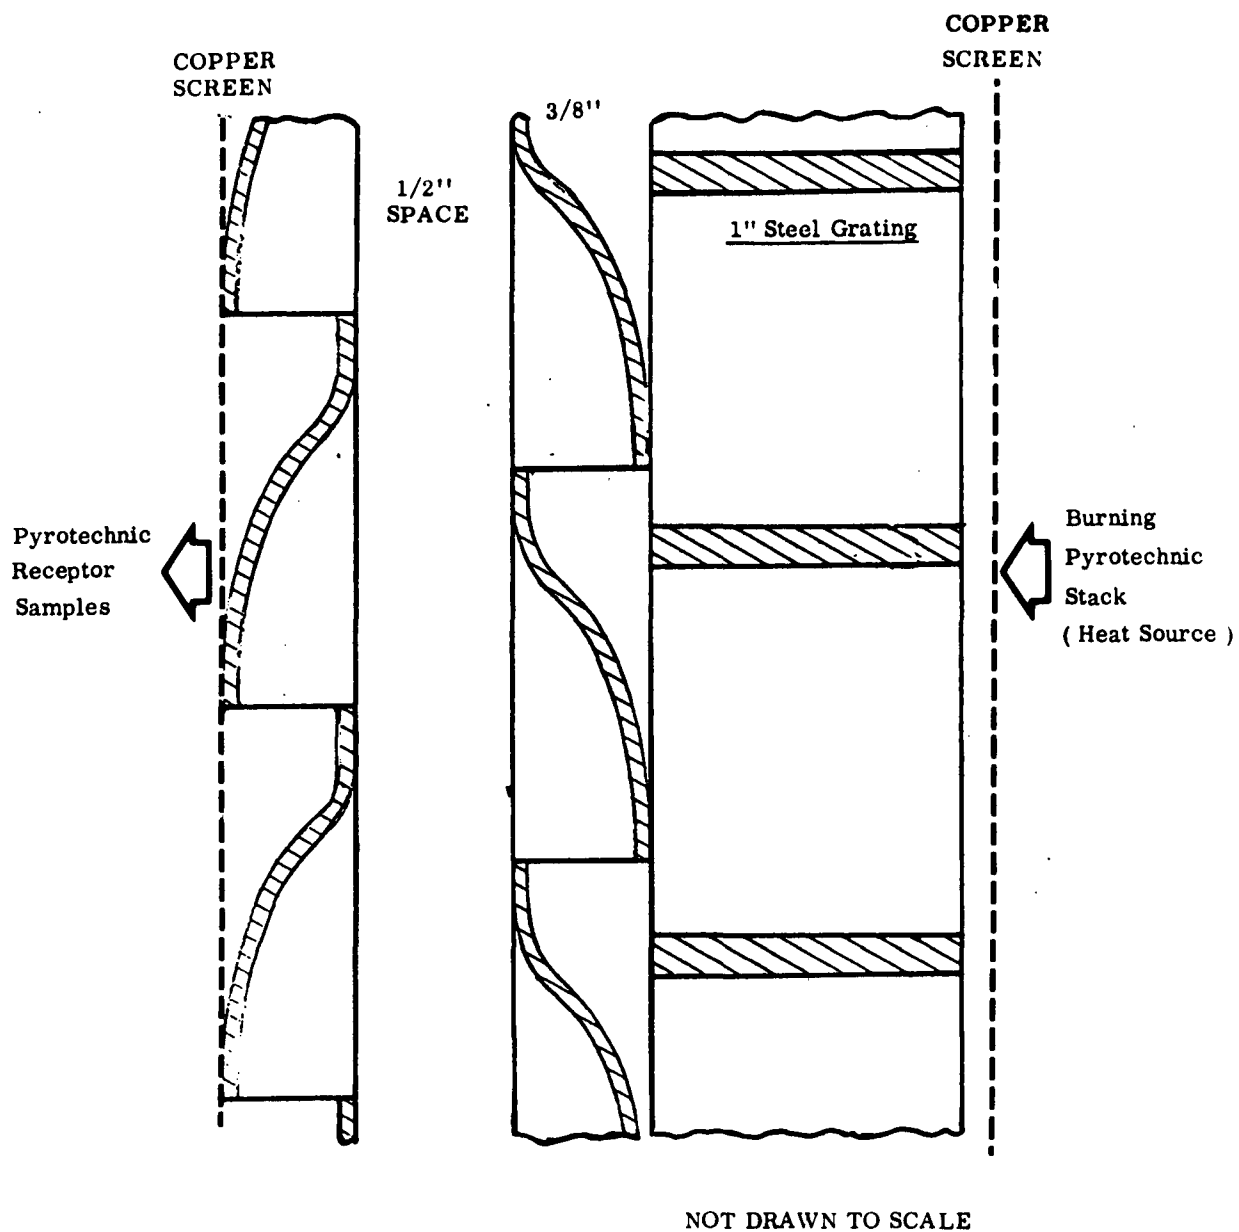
Cross-Section of Operational Shielding Panel Used as Heat Shield
